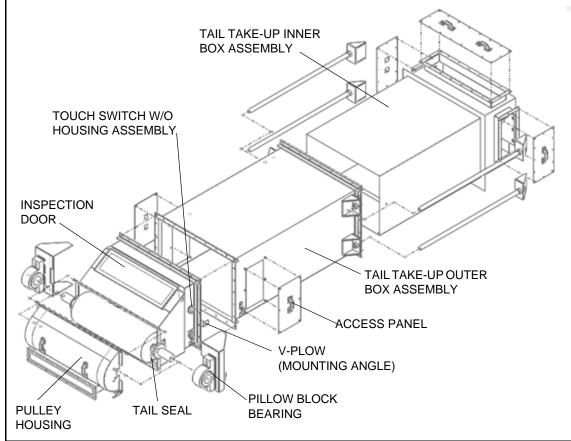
Exploded View of Tail Section with Screw Take-Up
